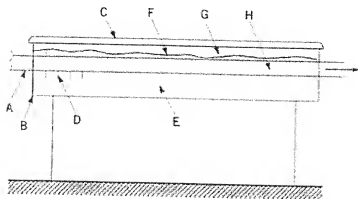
Vacuum calibrator for pipe and tubing extrusion: A, molten tube from die; B, tank; C, hinged cover with gasket; D, sizing rings; E, circulated and temperature controlled water; F, water level; G, vacuum; and H, inside of pipe open to atmospheric pressure (20).
